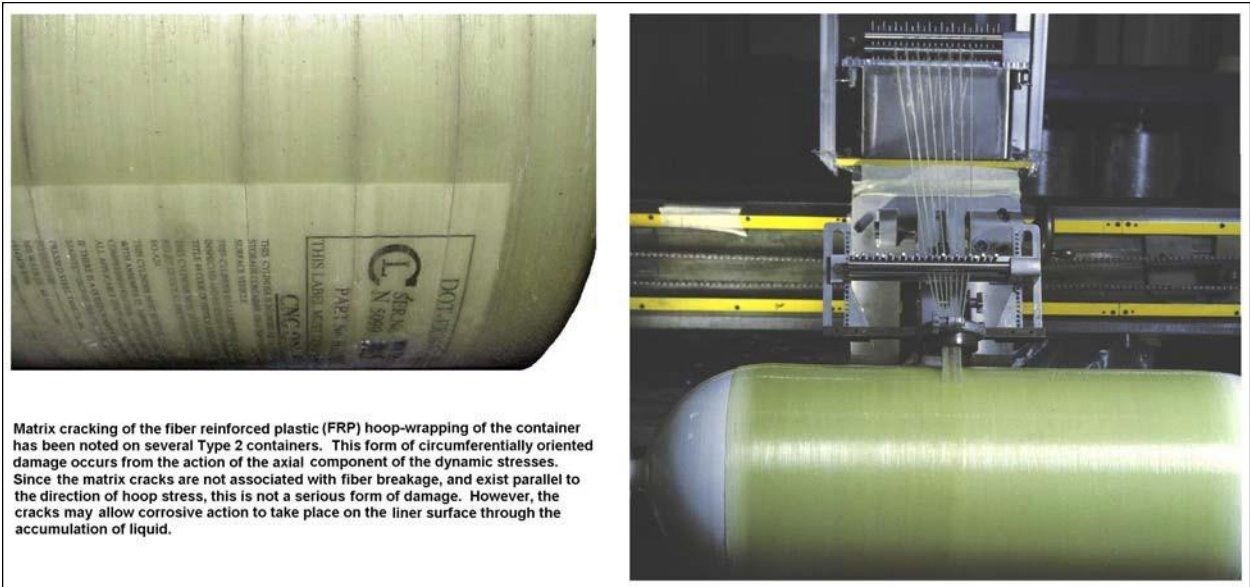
Type 2 Container Composite Cracking or Separations are Not Considered as Damage
